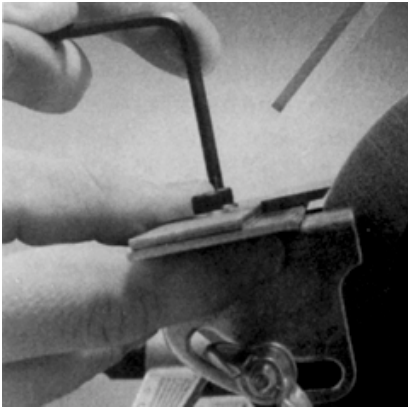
Reposition the knife guide so that the knife just touches the grinding wheel.
